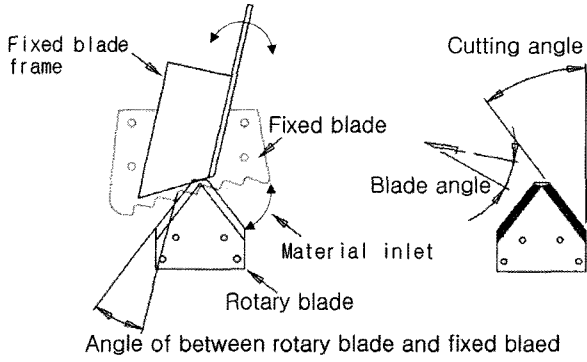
Rotary blade and fixed blade for the designed cutting mechanism.
